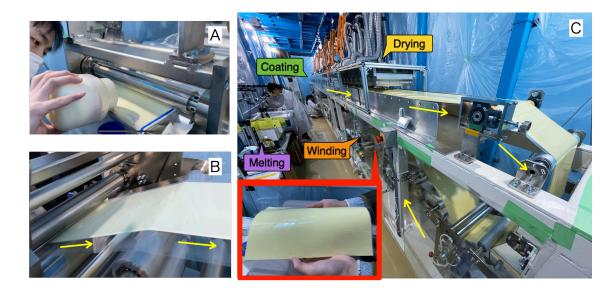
Photographs from the view of upstream(A) and downstream(B) of knife coater. A photograph C shows a whole of roll-to-roll emulsion film coating system. (The actual work is done in the dark.)
